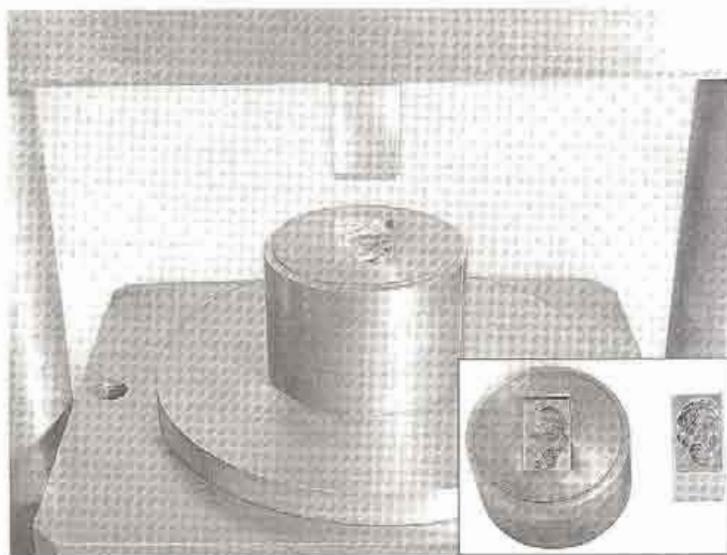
Hubbing a die block in a hydraulic press. Inset shows close-up of the hardened hub and the impression in the die block. The die block is contained in a reinforcing ring. The upper surface of the die block is then machined flat to remove the bulged metal.
